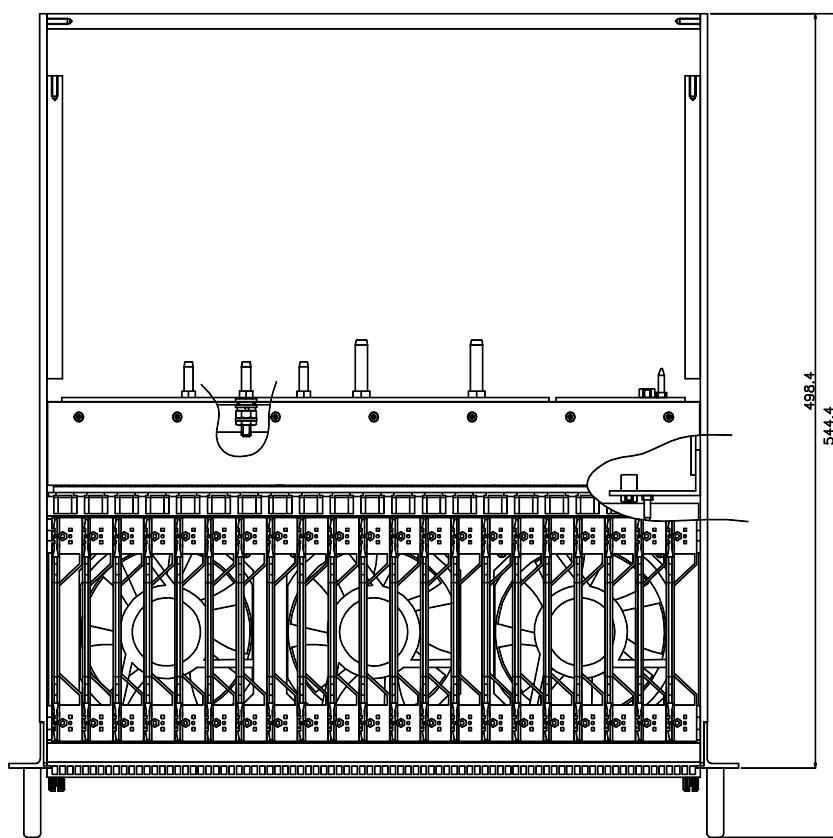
Mod. VME8100 Top view (Power Supply removed)
